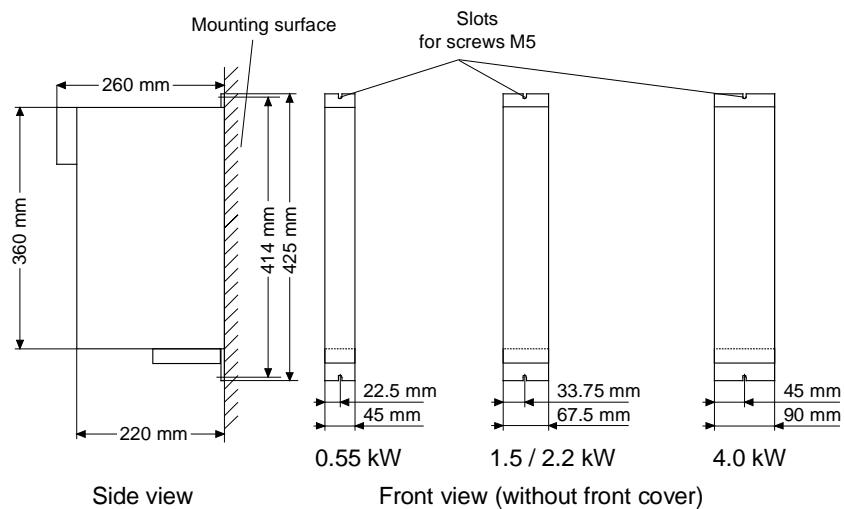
Dimension drawings for housings up to 90 mm wide
